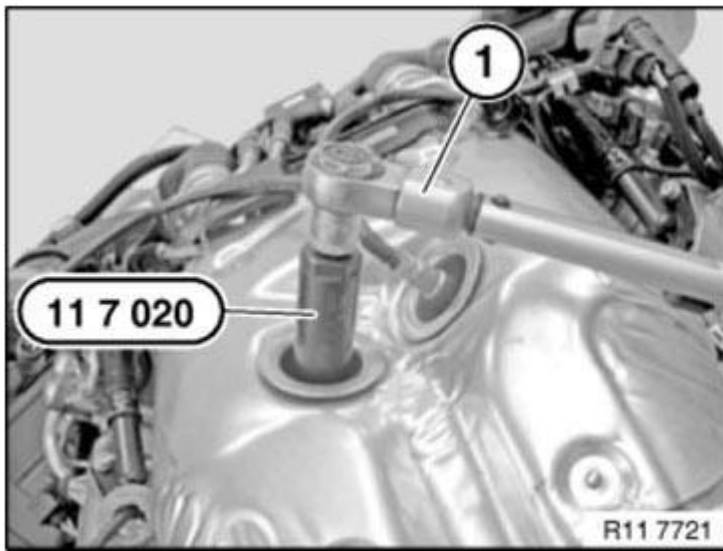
Releasing Control Sensor Using Special Tool 11 7 020
